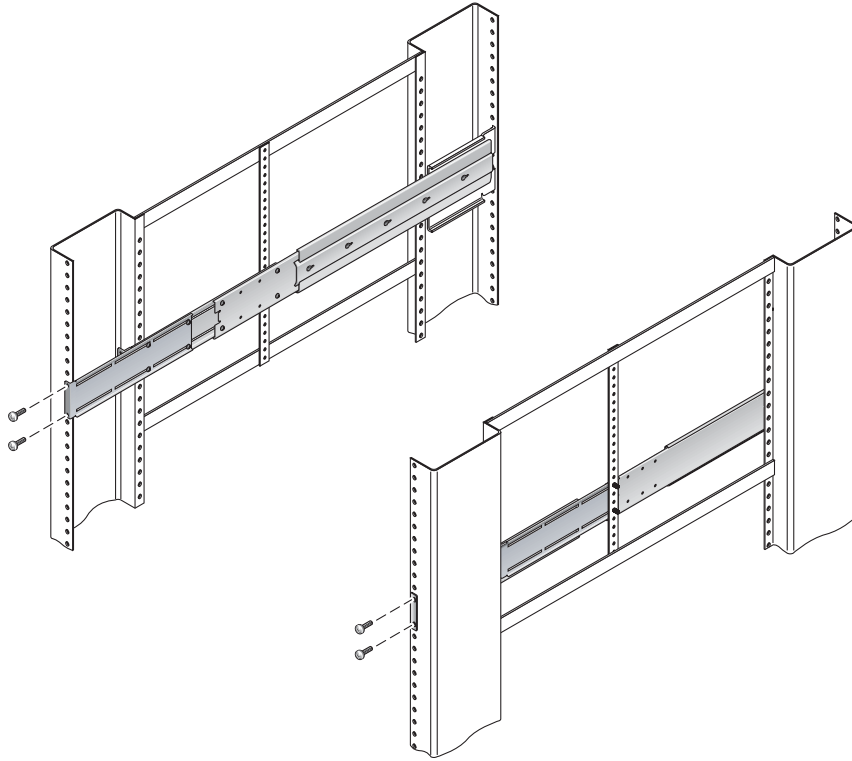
Installing Extender and Slide Assembly on Long Bracket
